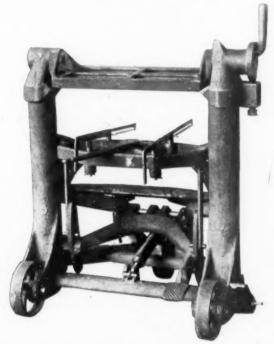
LITTLE WONDER OSBORN MOLDING MACHINE.
